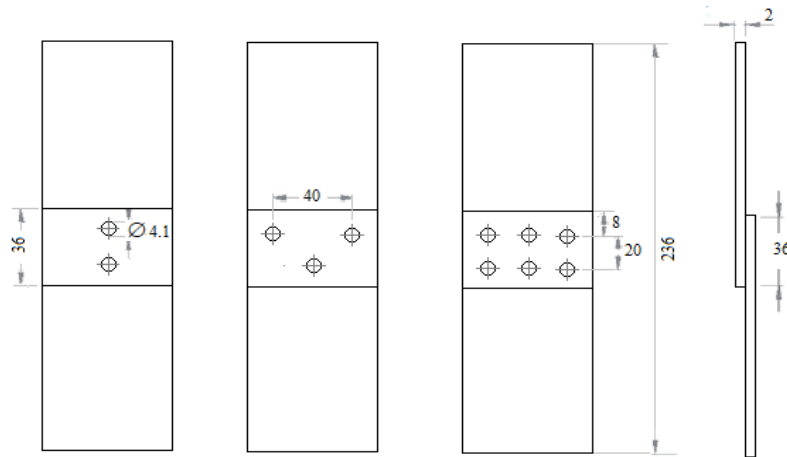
Geometric model of riveted joints, case 2 rivets, 3 rivets and 6 rivets
